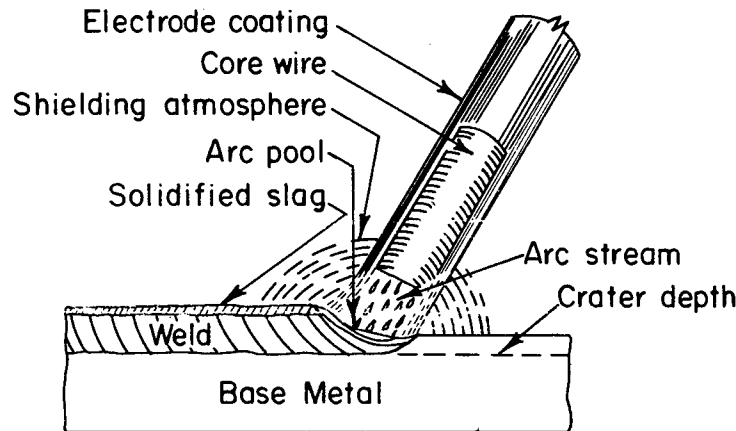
SCHEMATIC REPRESENTATION OF THE SHIELDED METAL-ARC WELDING PROCESS
